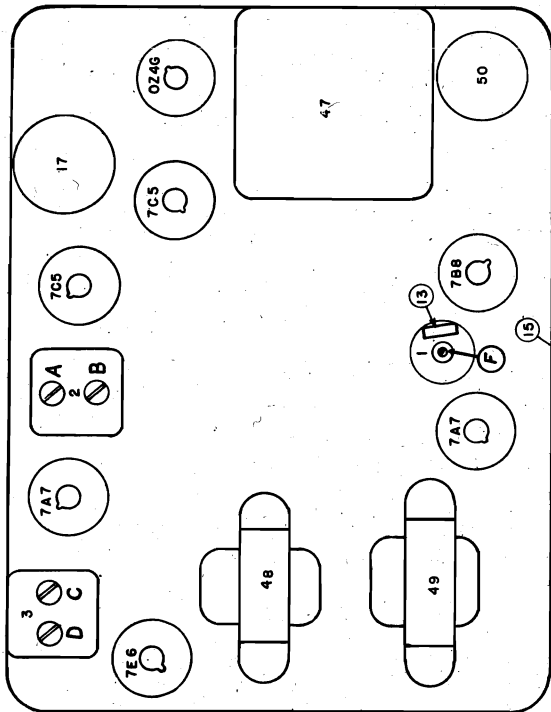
Parts Layout-Top View-Cadillac 1940 Rear Compartment Radio
